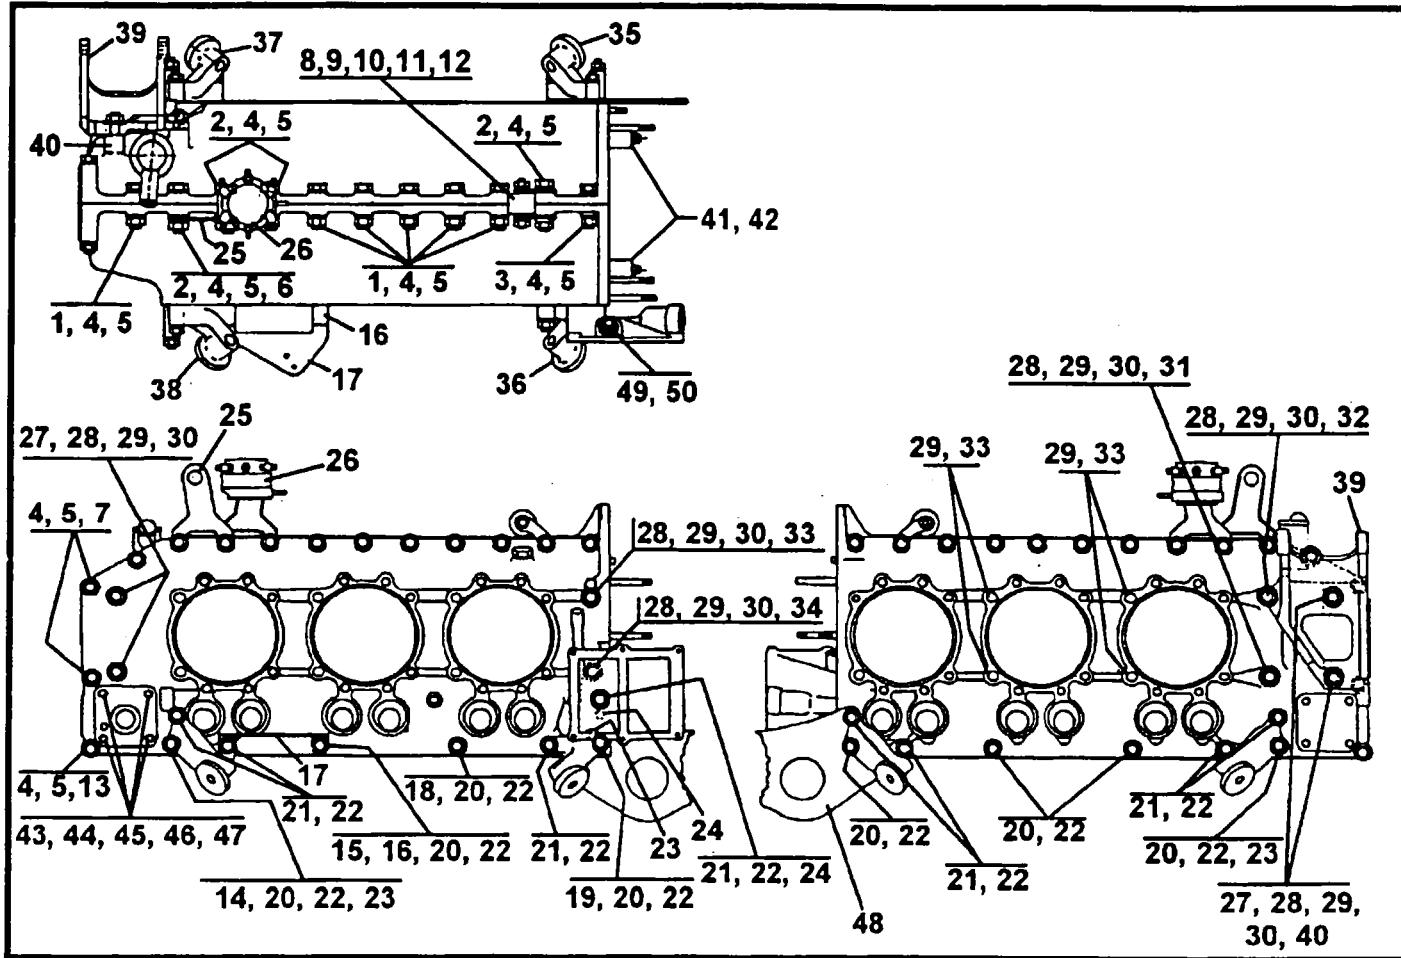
CRANKCASE ATTACHING PARTS
